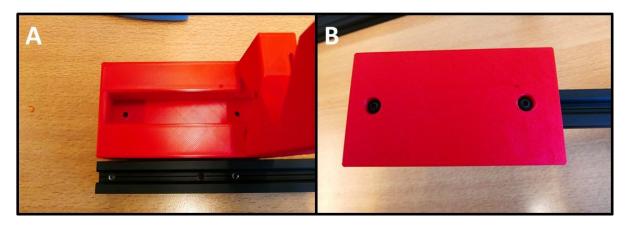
A) E End Mount next to 20x20 rail. B) E End Mount fastened using 2 M4x16 screws.
